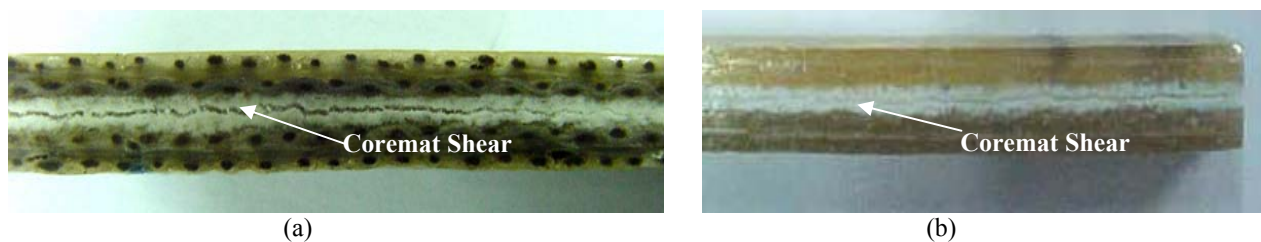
Shearing fracture after three-point-bend test. a) SGJ and b) SG.
